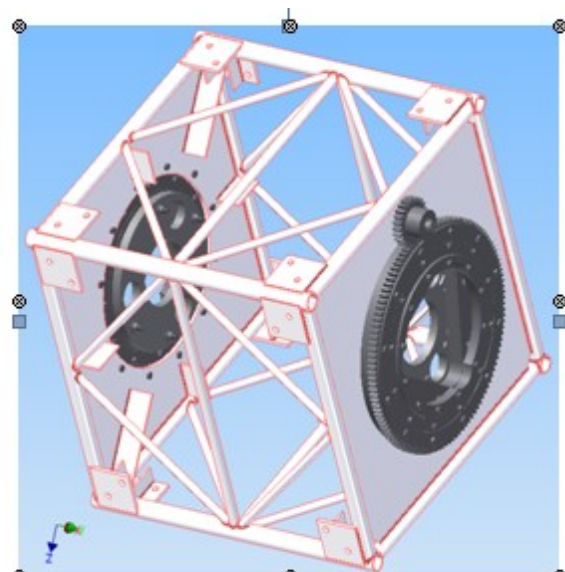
(c): Rotating Turret and Spur gear + pinion.
